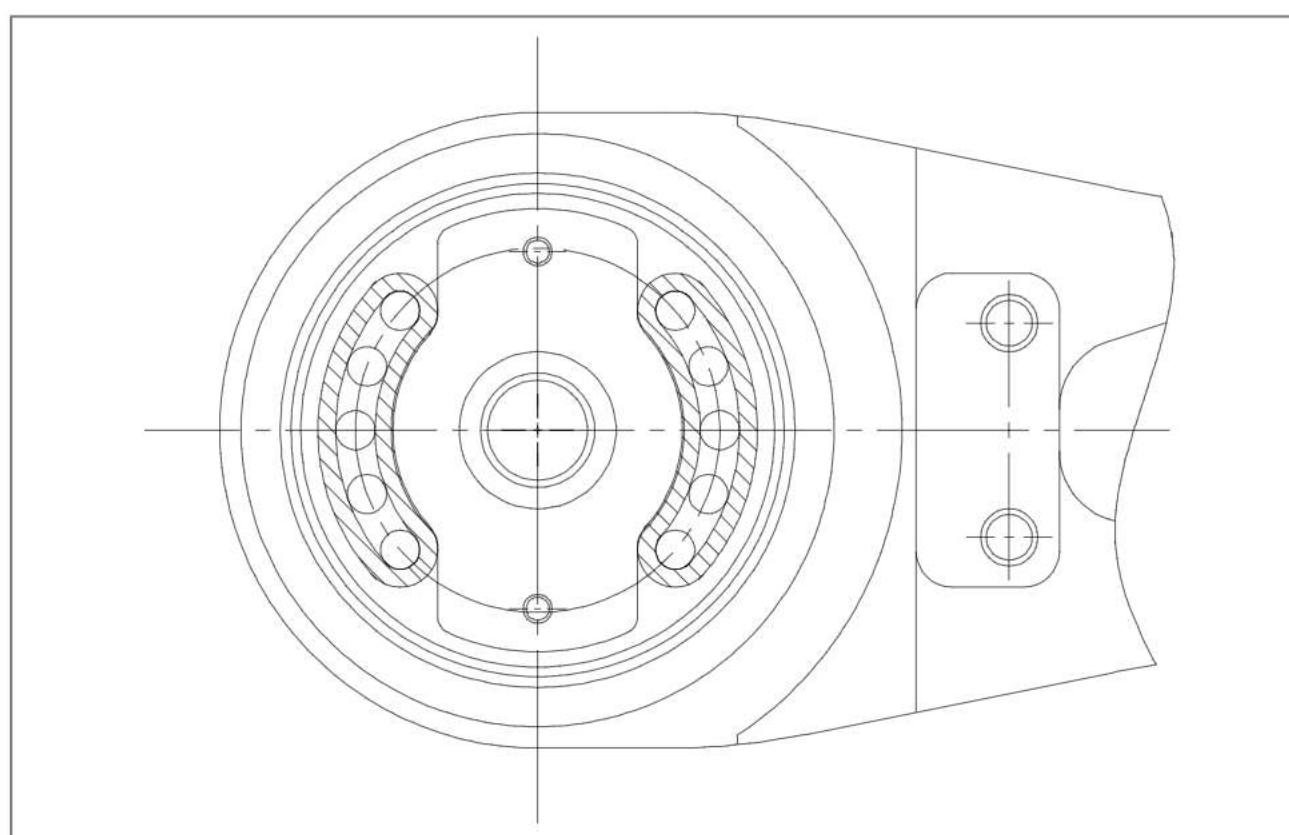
(b) Applying sealant to the J2-axis reducer
